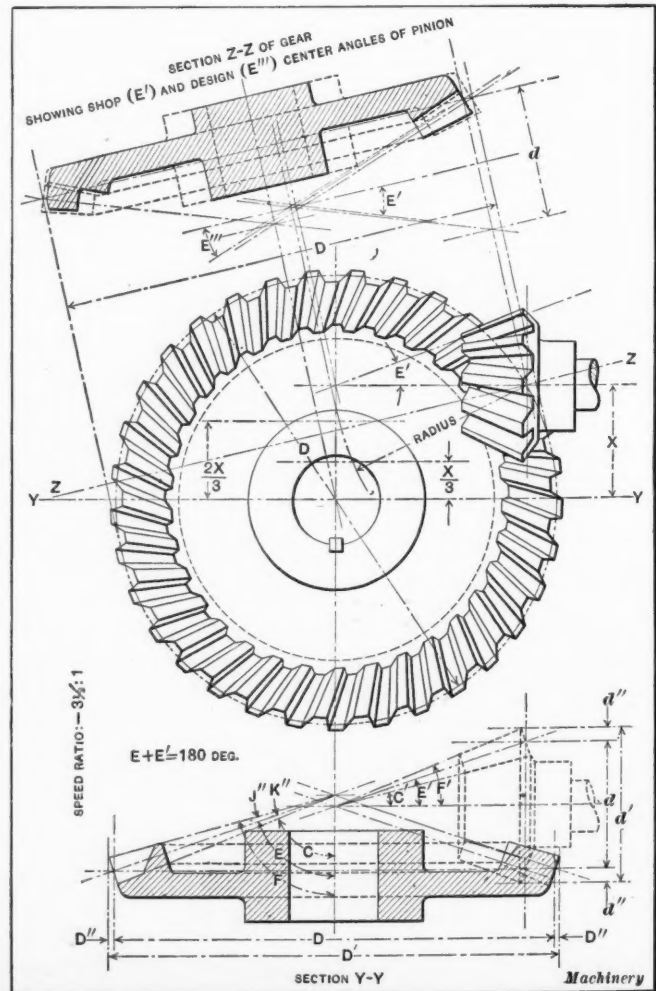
Diagram showing Principles involved in Lay-out of Type B Skew Bevel Gears, in which both Gear and Pinion have Skew Teeth
